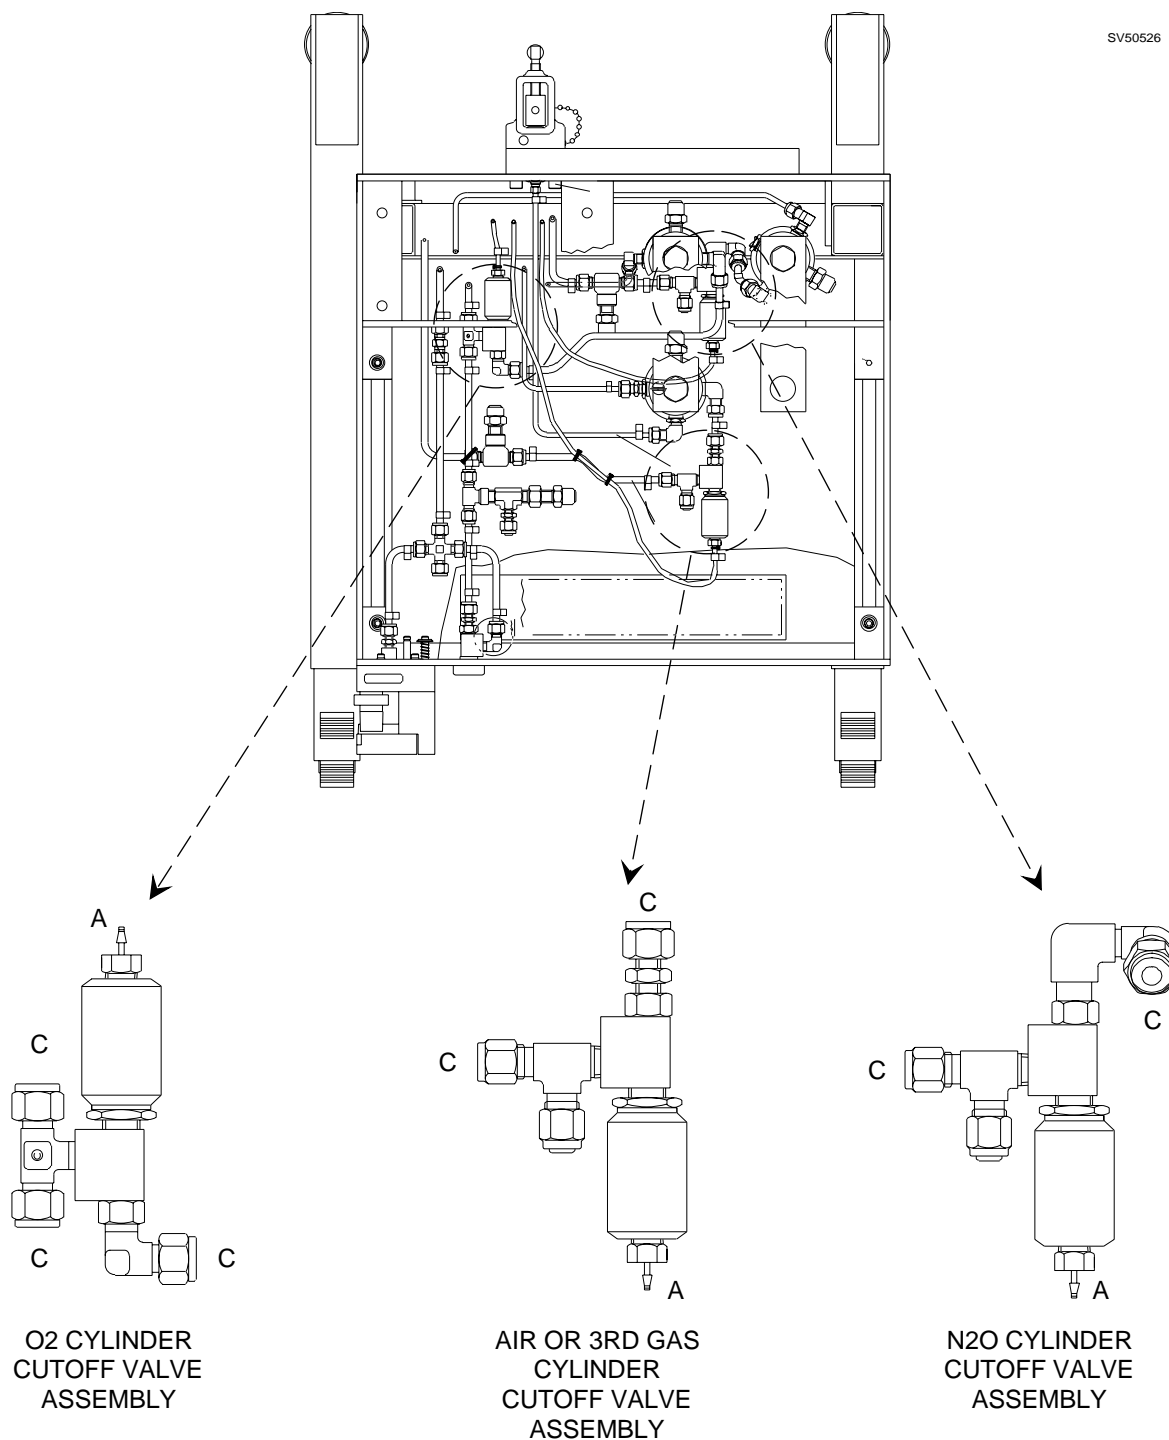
CYLINDER CUTOFF VALVES (CANADA)
